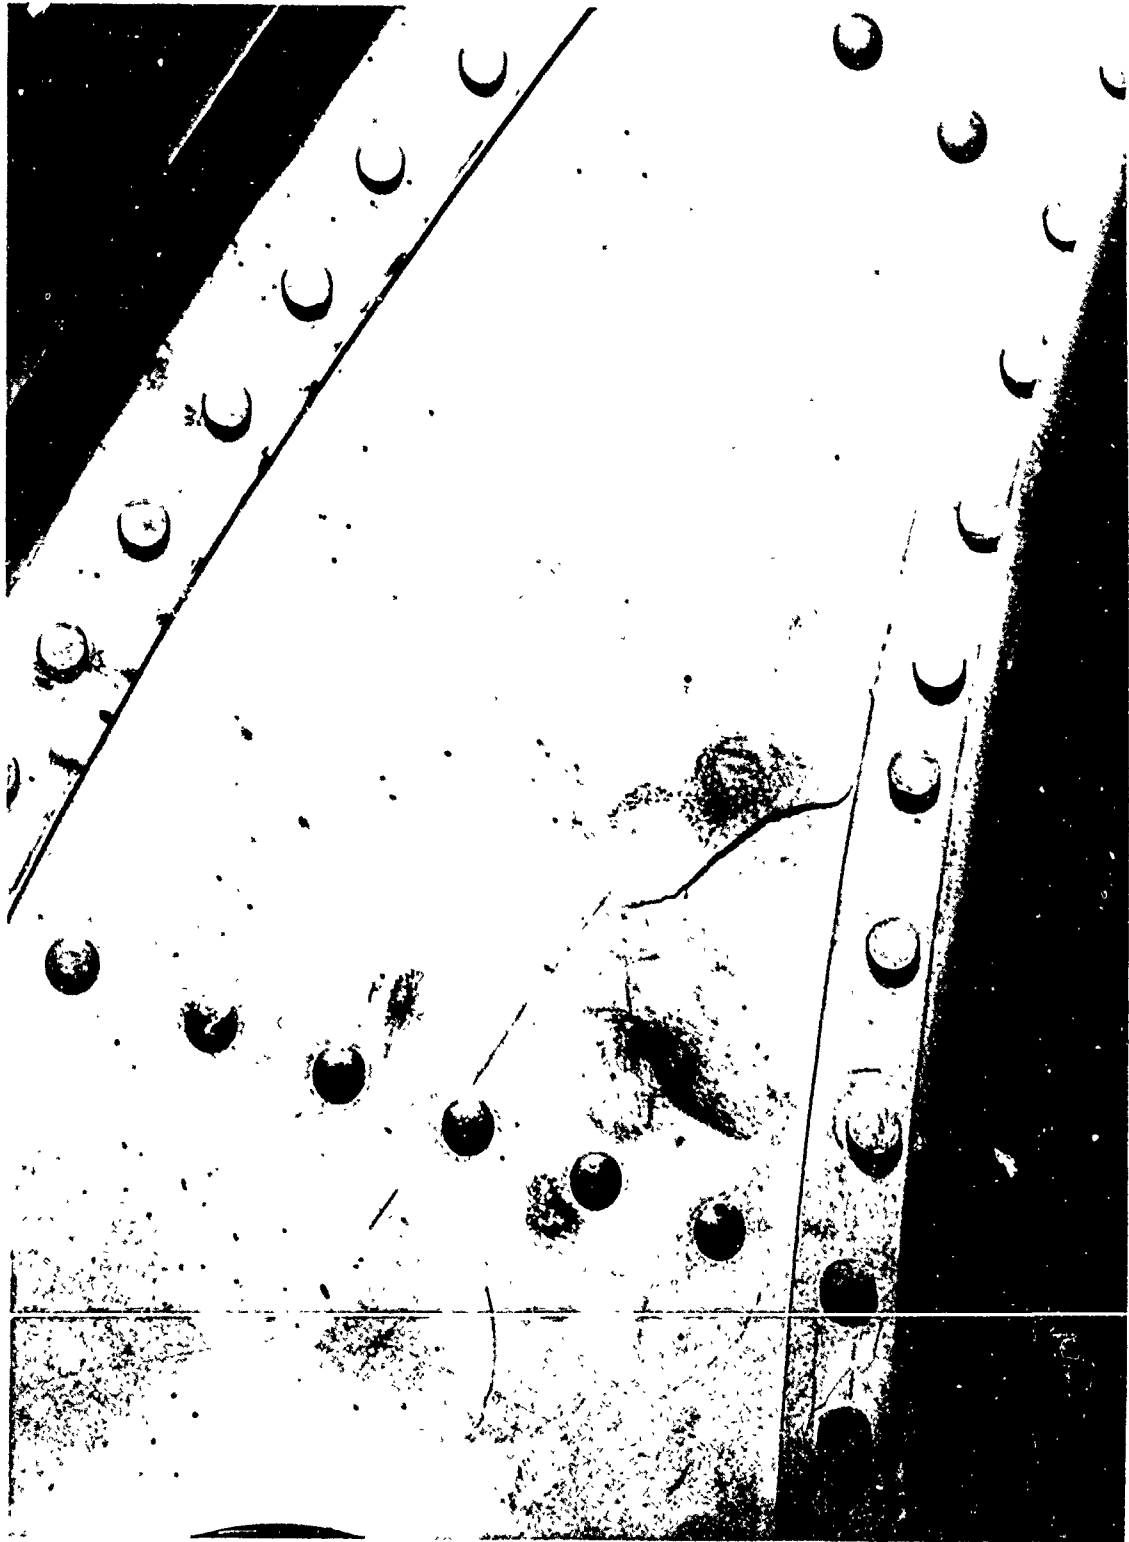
RIVETED FUSELAGE CANTED BULKHEAD ASSEMBLY;
